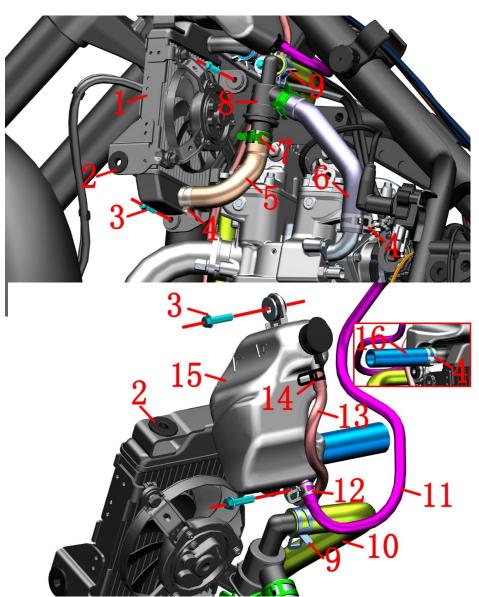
Co	OOLING SYSTEM	Water tank assembly 3	CHK	40)
